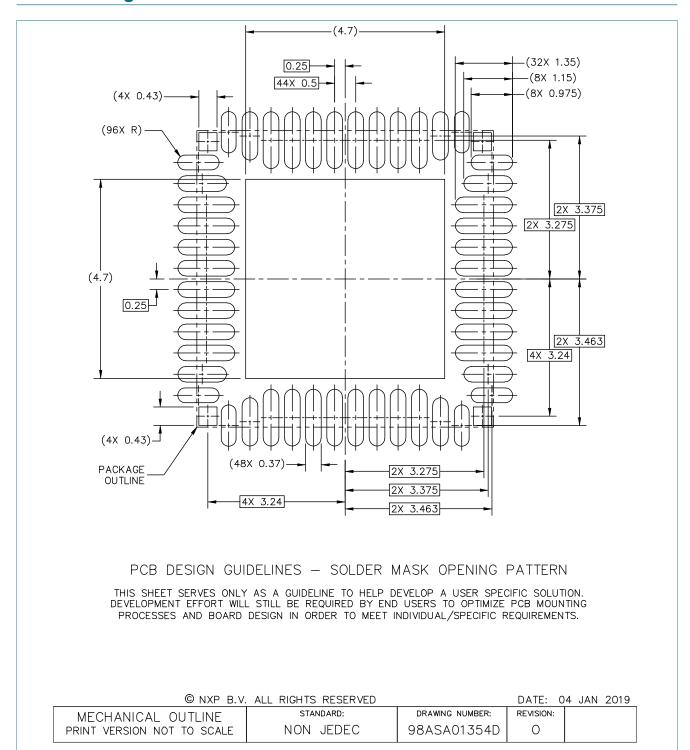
Reflow soldering footprint part1 for HVQFN48 (SOT619-26(DD))
